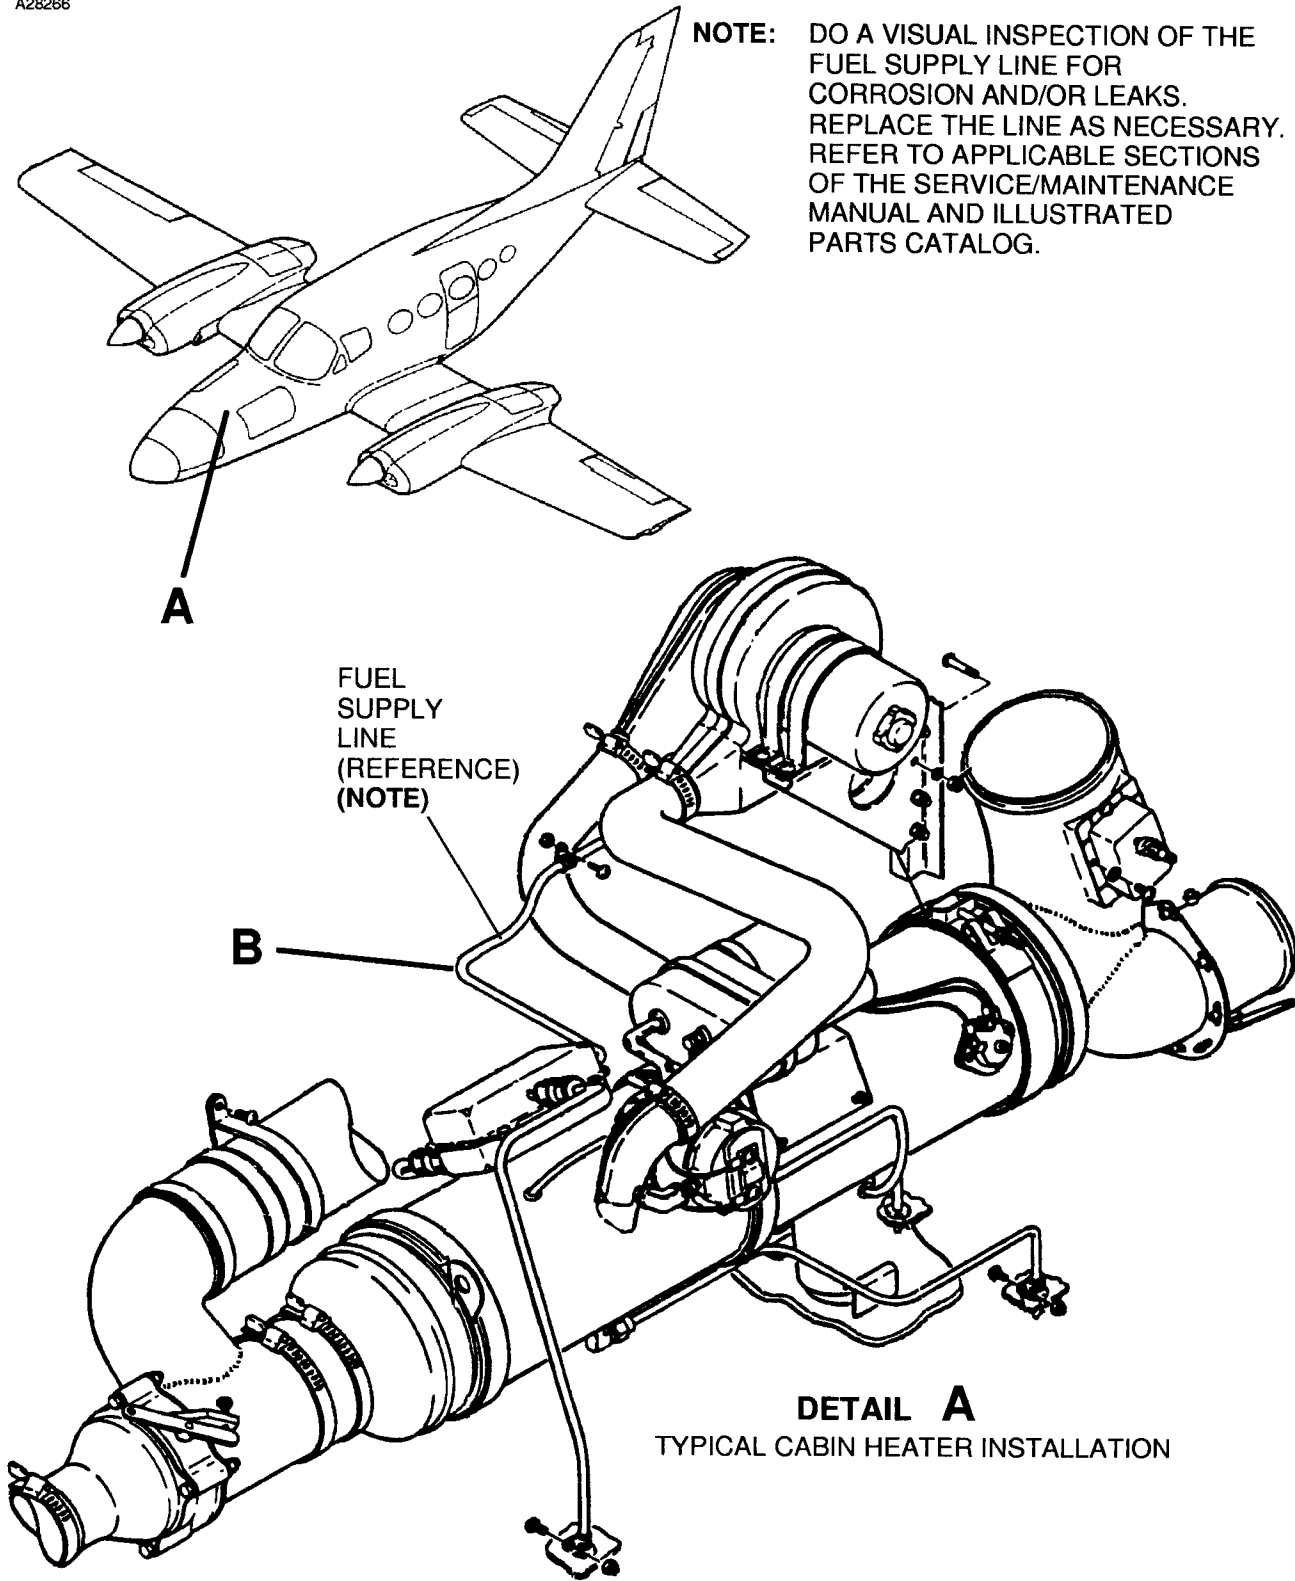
Cabin Heater Fuel Line Inspection (Sheet 1)
